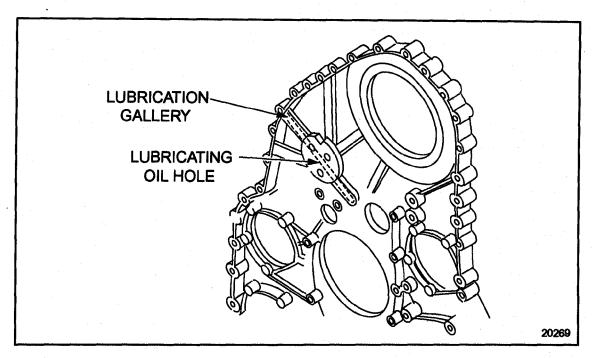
Adjustable Idler Gear Oil Gallery Location
